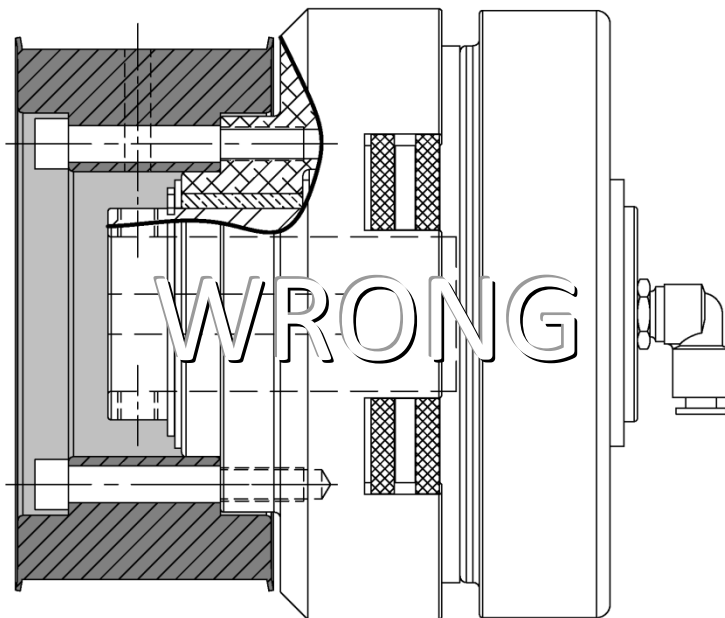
A illustrates a double strand sprocket which has been properly machined for and mounted to the clutch pilot. The load is centered over the ball bearing. The mounting method shown in Figure 3B, however, produces an overhung load. Operating a clutch with an overhung load will cause the bearings or bushing in the pilot of the clutch to wear prematurely. Overhung loads can bind the internal components of a clutch causing delay in engagement and disengagement of the clutch or preventing engagement or disengagement altogether.
